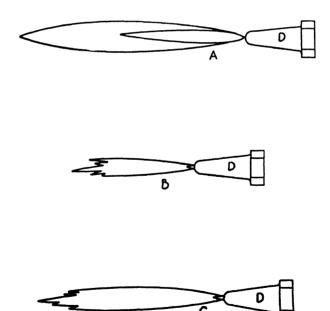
Welding Flames: A. Carburizing flame, B. Oxidizing flame, C. Neutral flame, D. Torch tip
